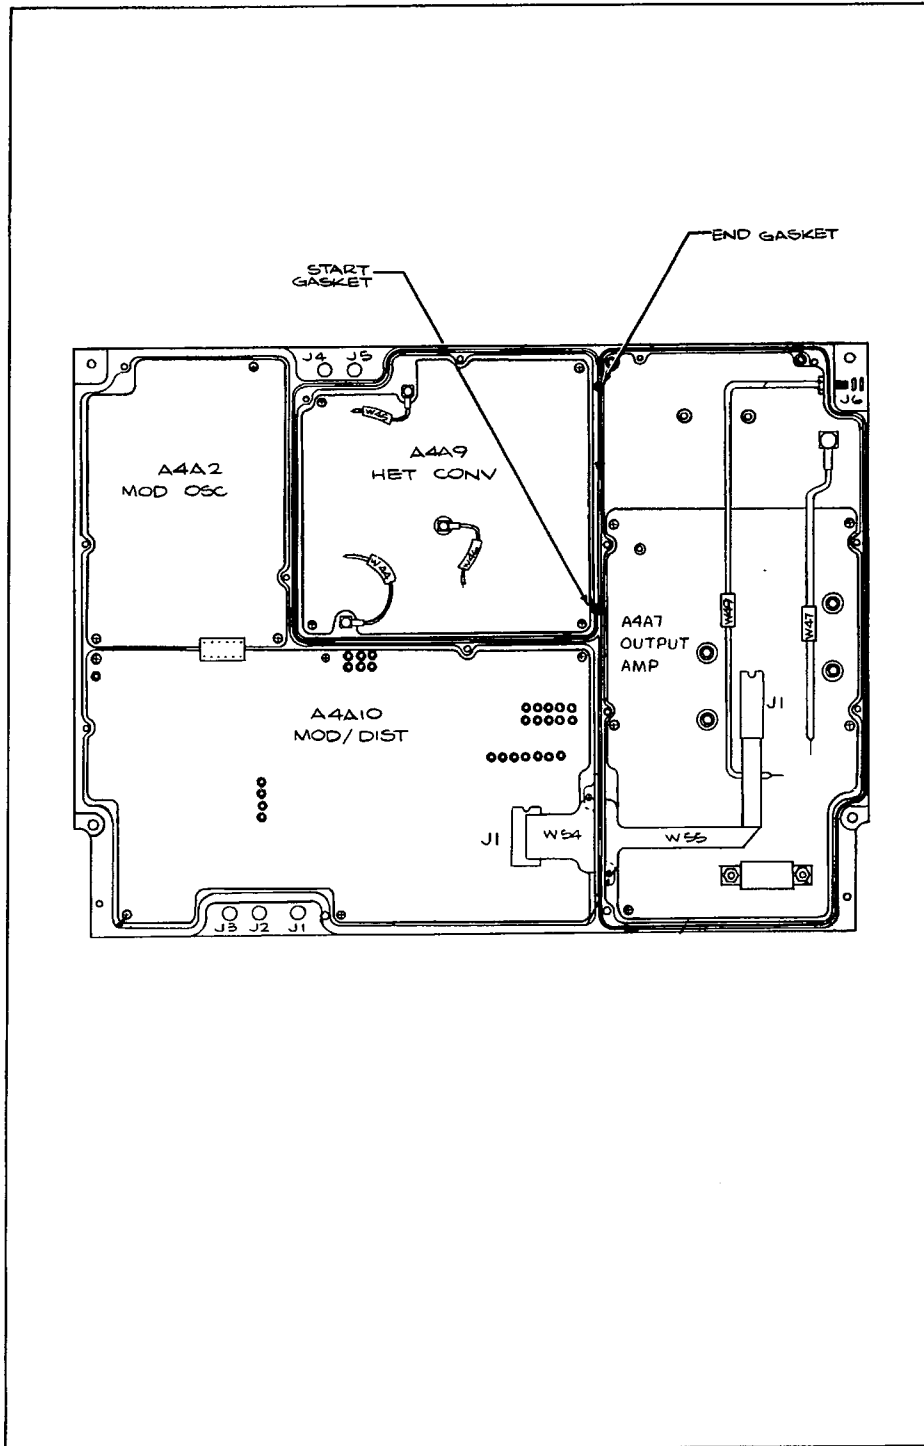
RF Gasket Positions - Bottom of Output Module
